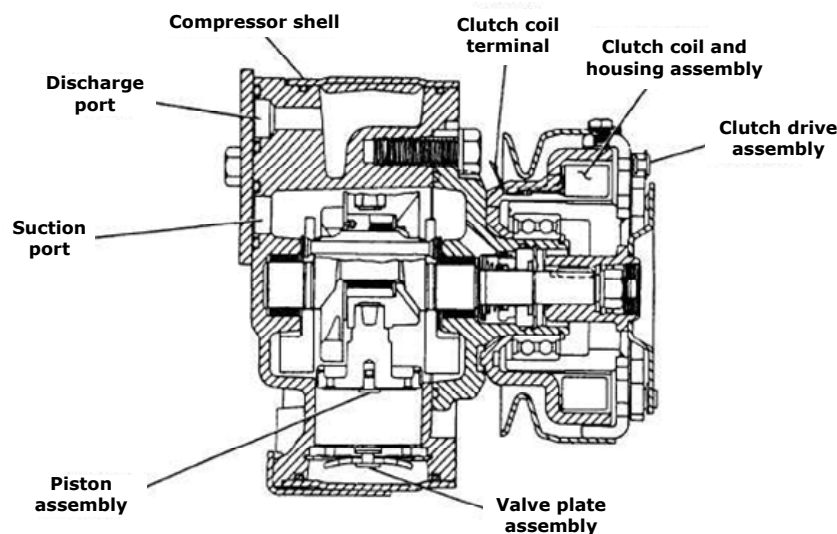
Through view for a four-cylinder radial type compressor [1.14]
